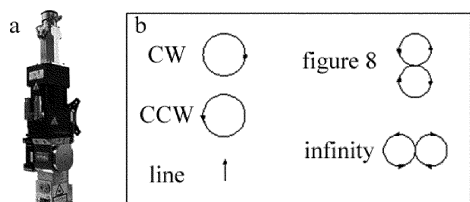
D50 welding head and its five different forms of scanning mode
